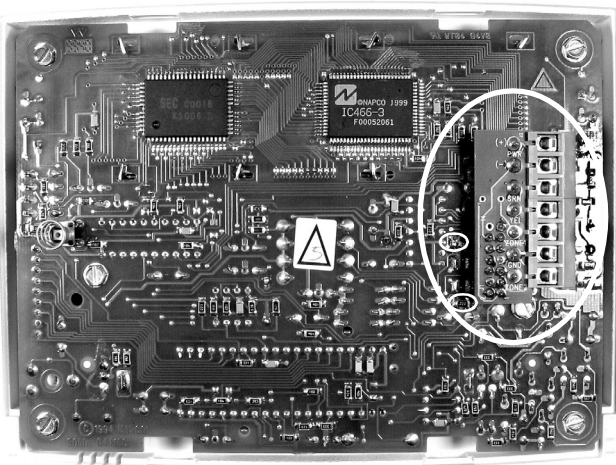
Completed circuit board. The added terminal strip (large circle at right) is located next to the two added resistors (two smaller circles).
